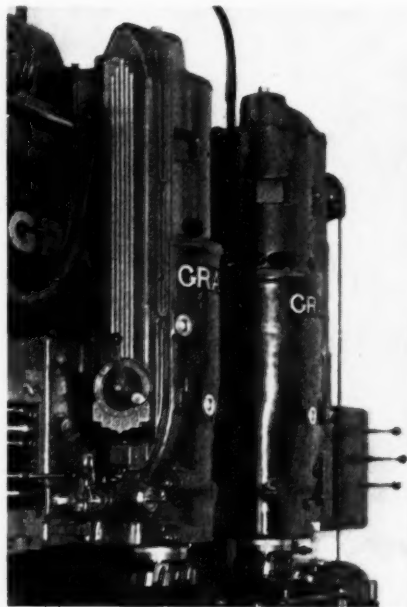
Close-up View of Unit Type Milling Heads on Cross-rail
